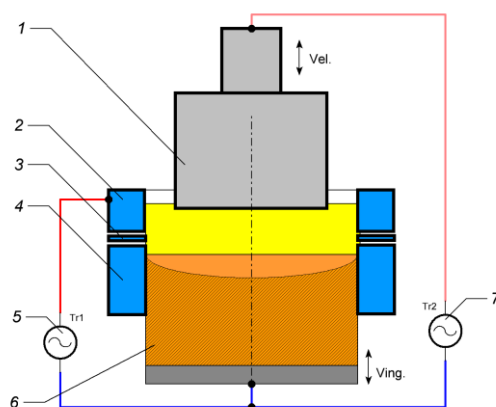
Schematic representation of the ESR in a current supplying mould with a two-circuit power supply scheme (1 - consumable electrode; 2 - current supplying section of the mould; 3 - separating section of the mould; 4 - forming section of the mould; 5,7 - power supply; 6 - ingot)
